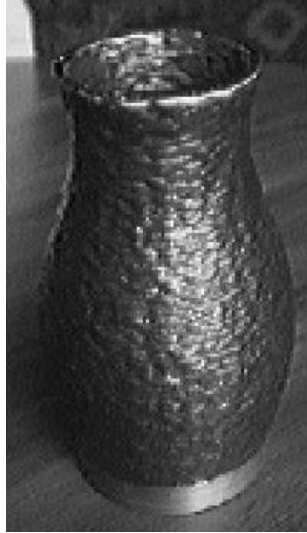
First successful integration of CAD and welder controls [22]
